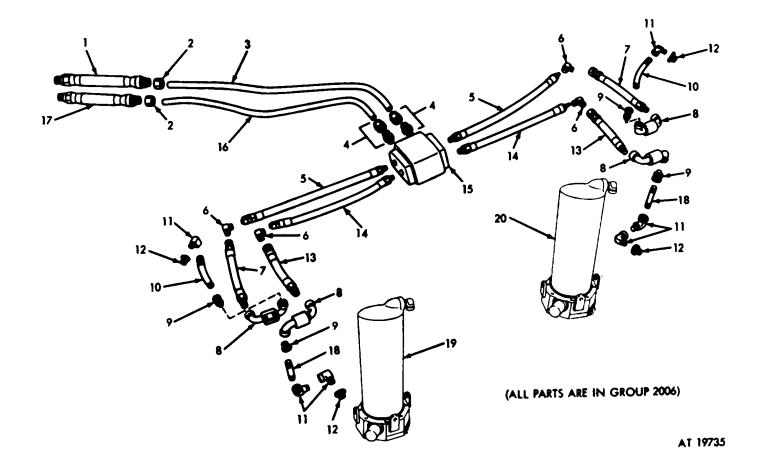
Hydraulic hoses, lines, tubes, fittings, and valves (sheet 2 of 2)-partial exploded view.
